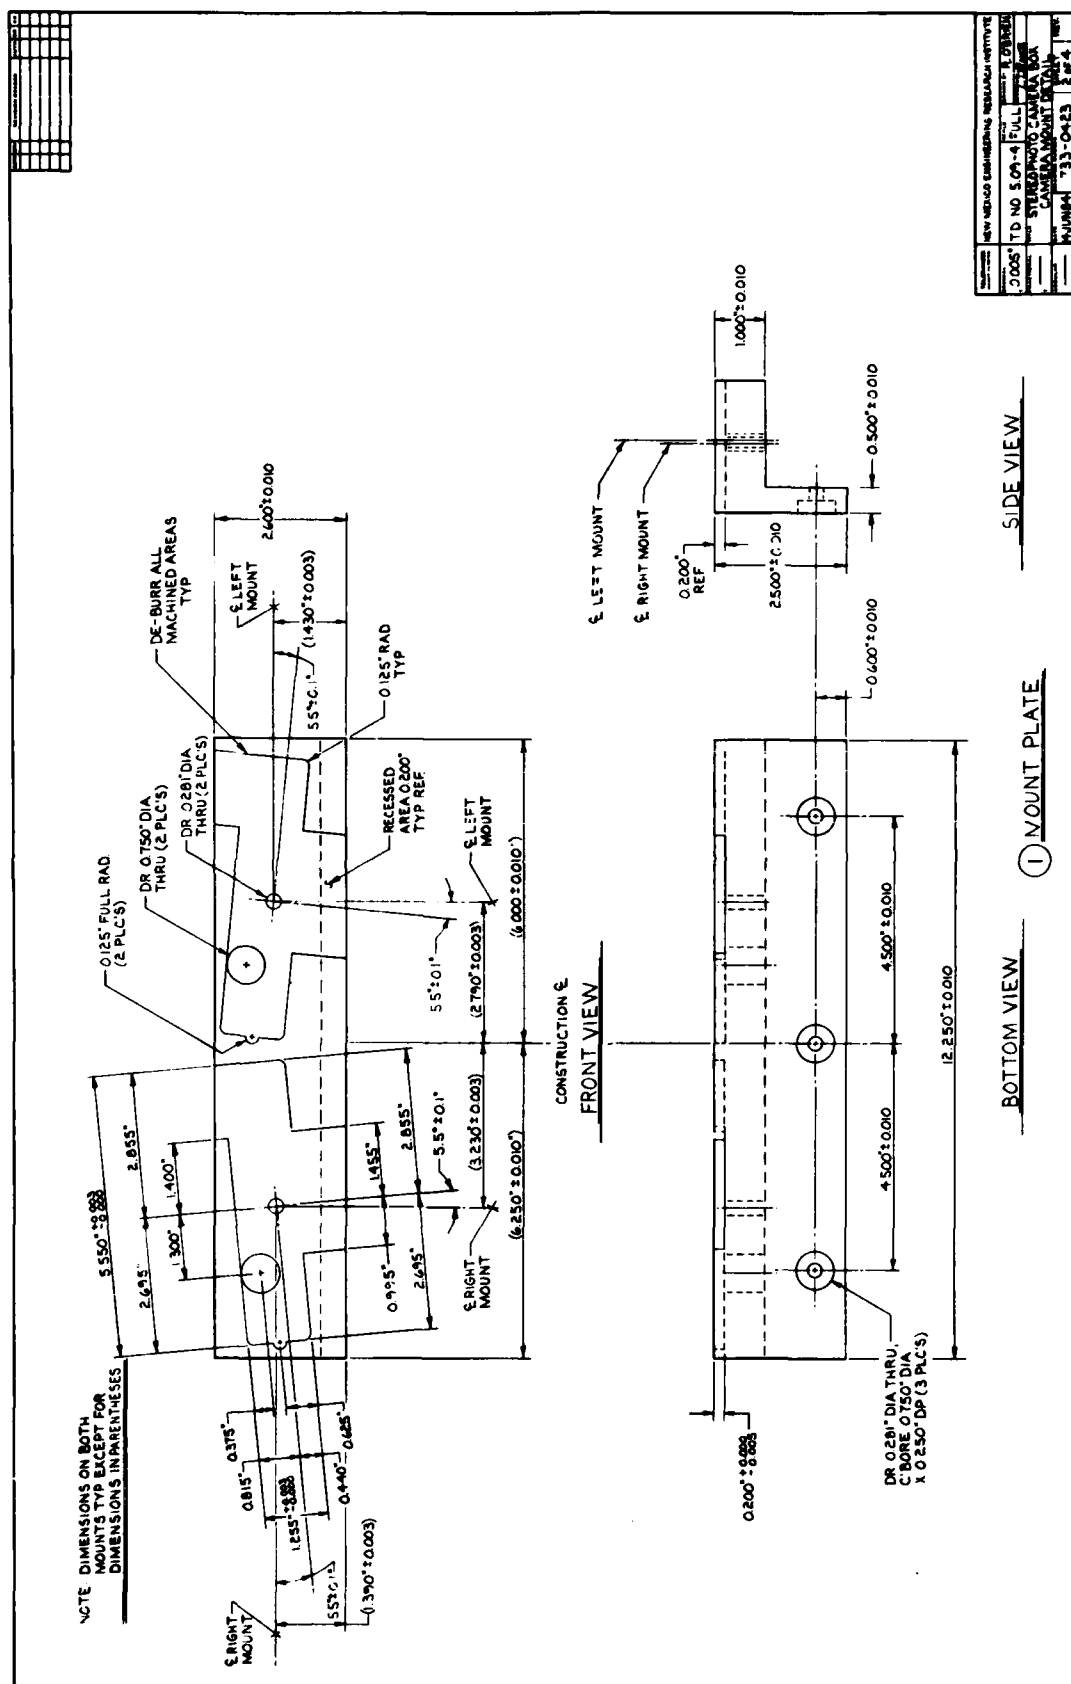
STEREOPHOTO CAMERA BOX--ASSEMBLY
